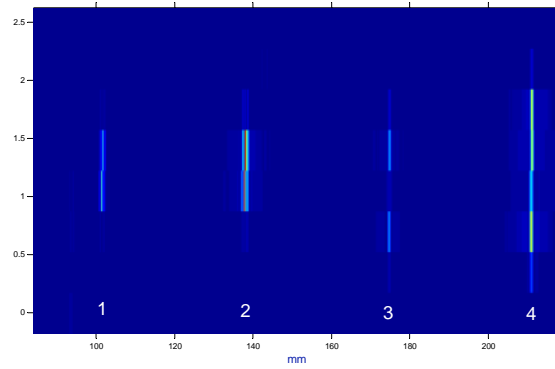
Detection of the surface breaking flaws in the small radius mock-up with the multi-elements probe.
